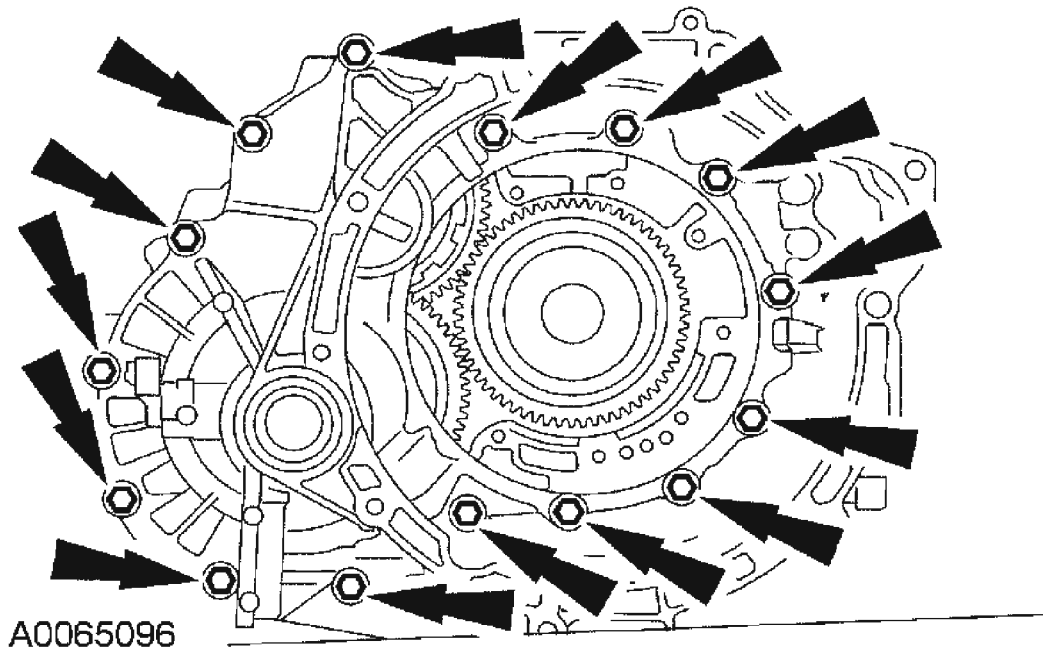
Removing Bolts And Separate Converter Housing From Transaxle Case
